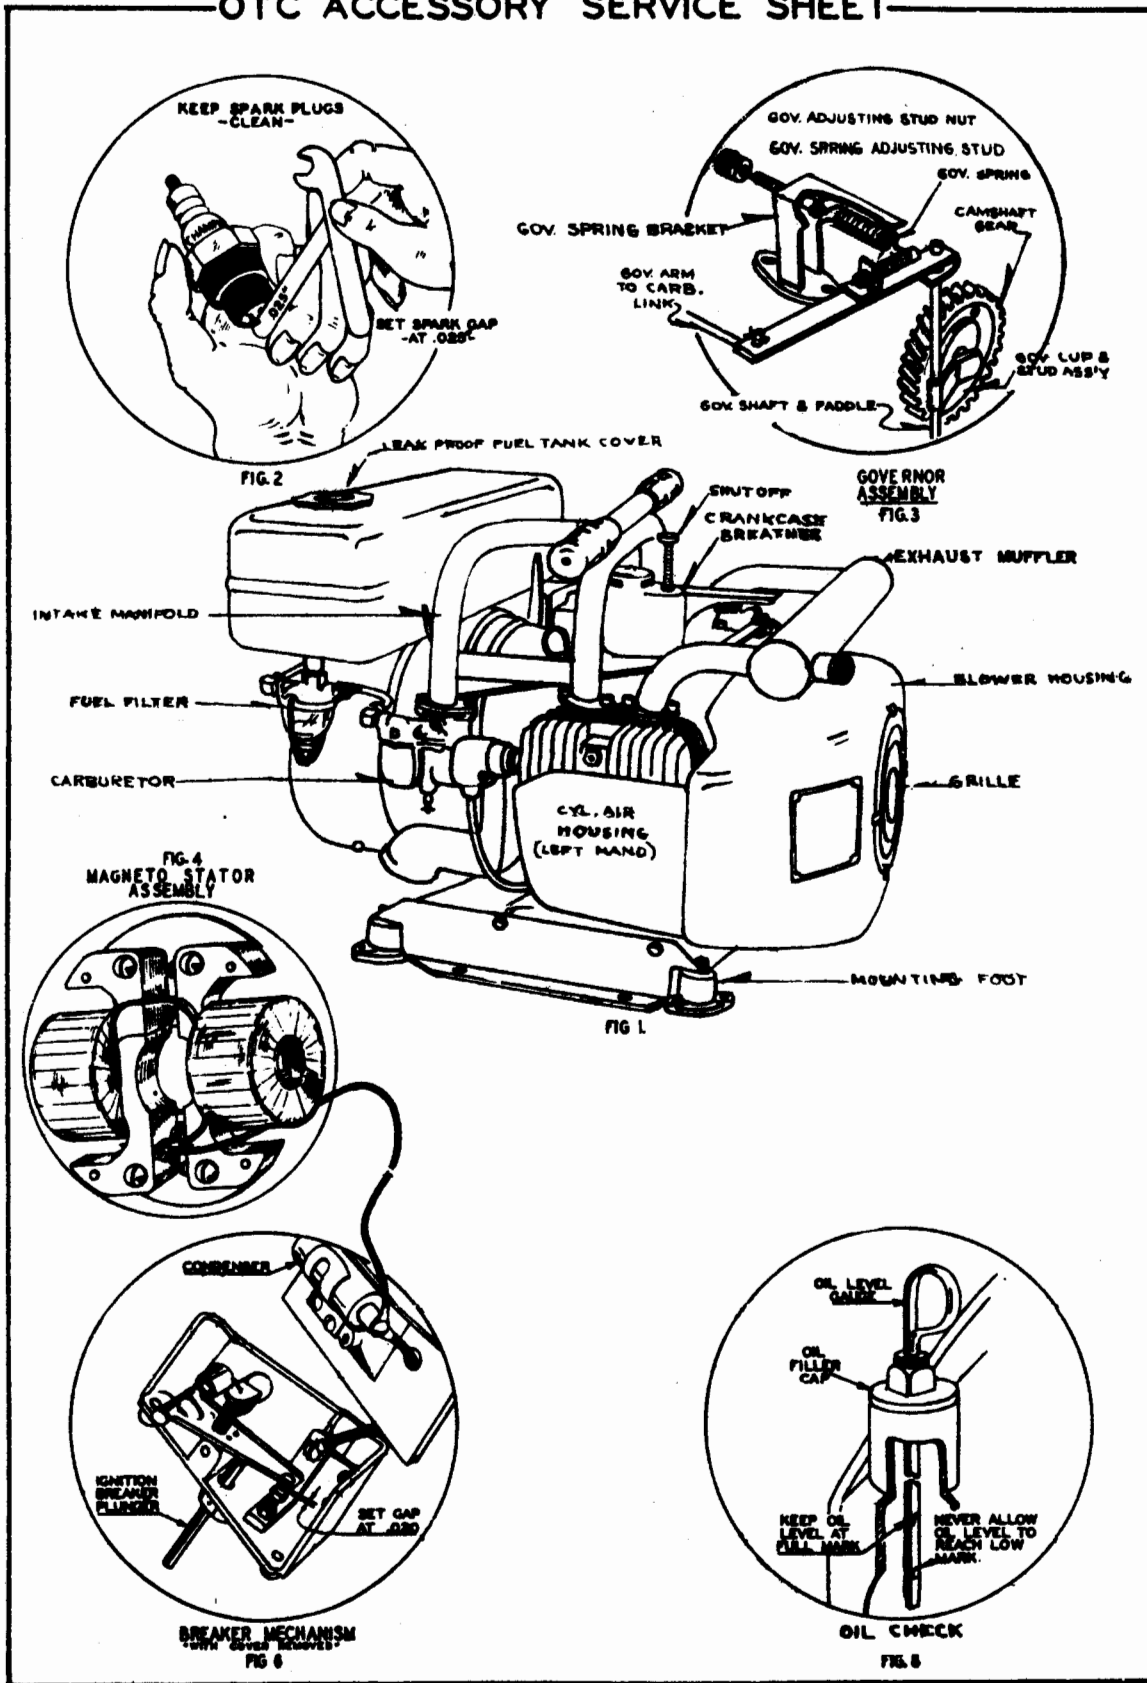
Accessory Service Drawing for Engine Generator Set Type CDO-73004
